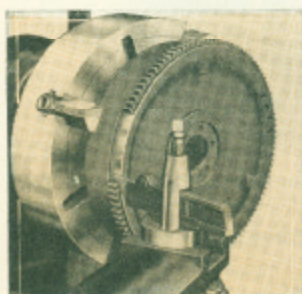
Section of Flywheel Teeth Removed to Show the Groove Cut Under the Teeth by the Tool
